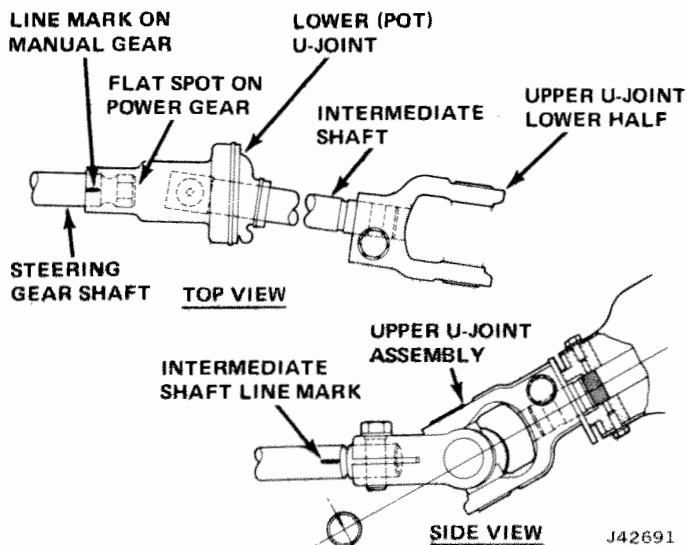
Steering Gear-to-Steering Wheel Alignment
